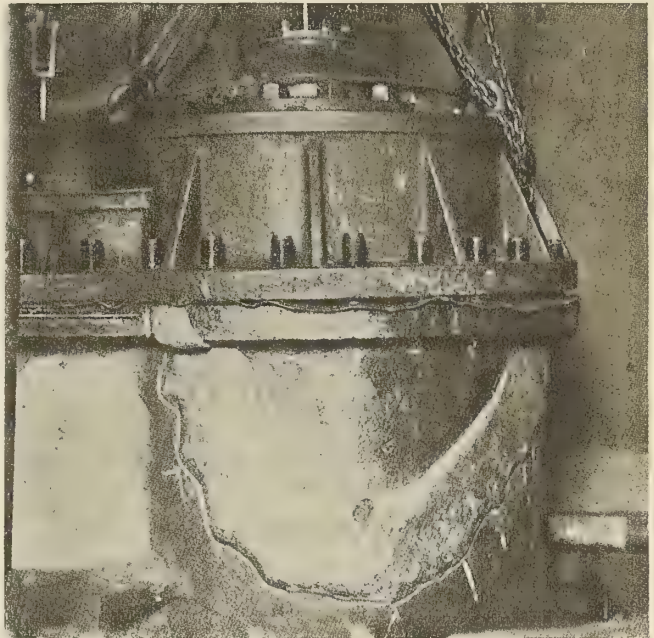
Same as Fig. 1, Finished Weld
